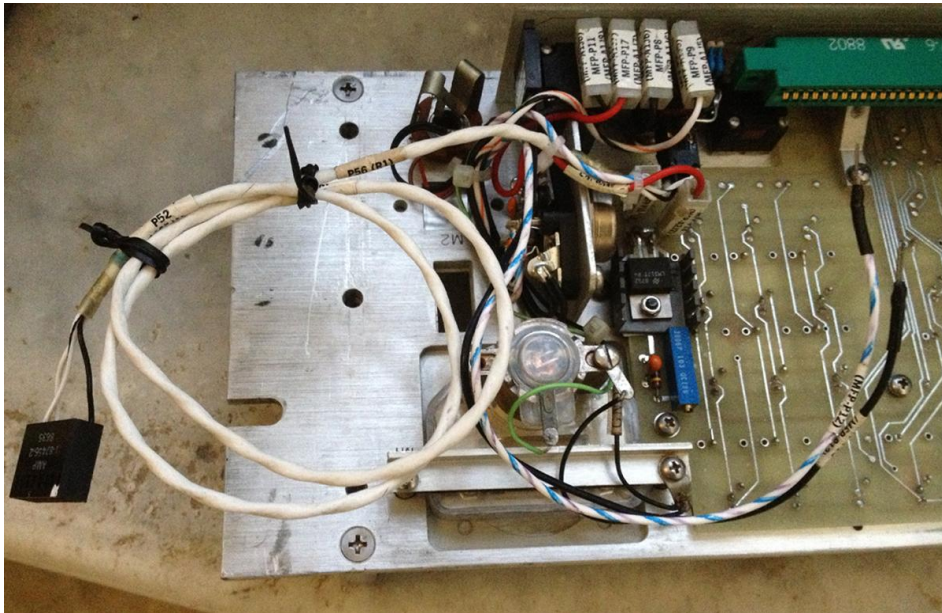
The MFP Front Panel Assembly with all the left-side connectors in place.
